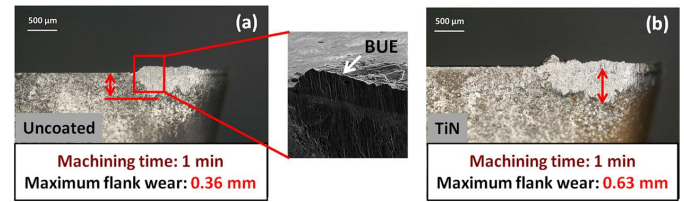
Flank wear images of the (a) uncoated and (b) TiN coated cutting tools.
